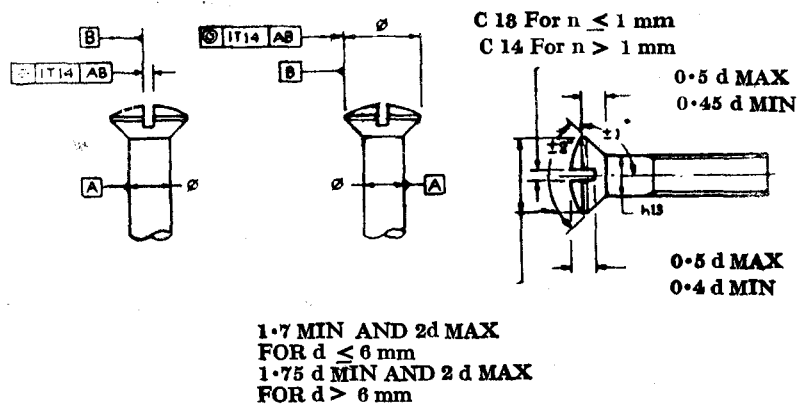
Slotted or Recessed Raised Countersunk Head Screw
